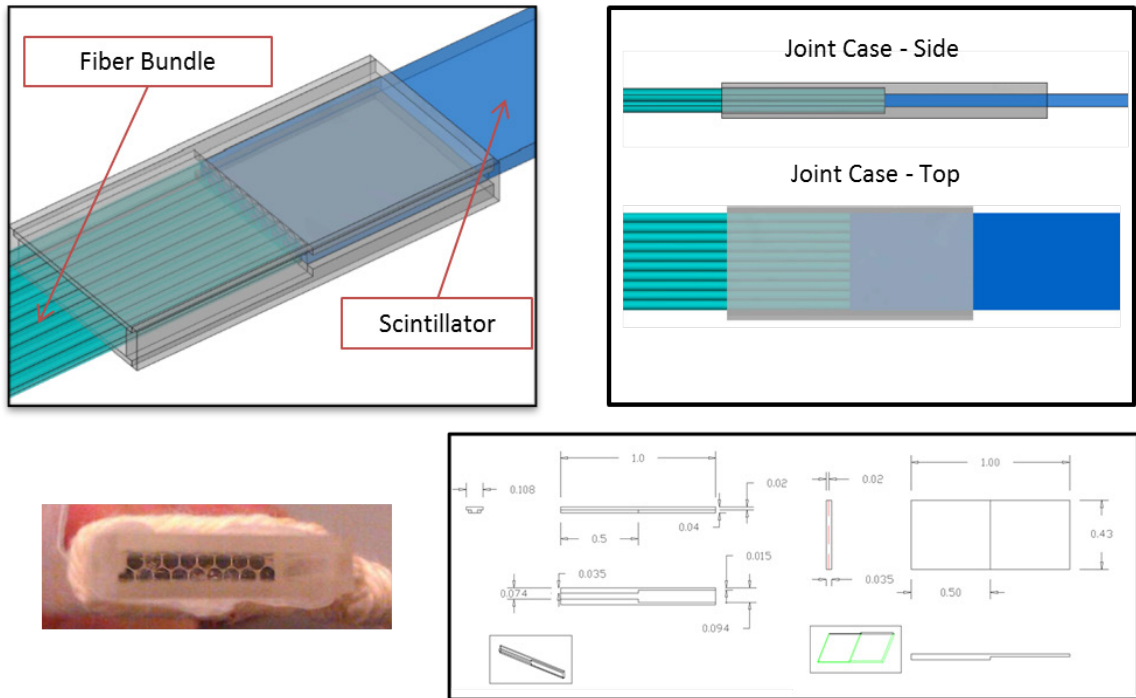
The optical connection between fiber bundle and scintillator strip. Two of each piece depicted in the lower right hand corner drawing are used to make the joint case. A photo of the step prior to filling the joint case cavity with optical cement and inserting the plastic scintillator is shown in the lower left. Proper alignment of a finished optical connection is shown on top.
